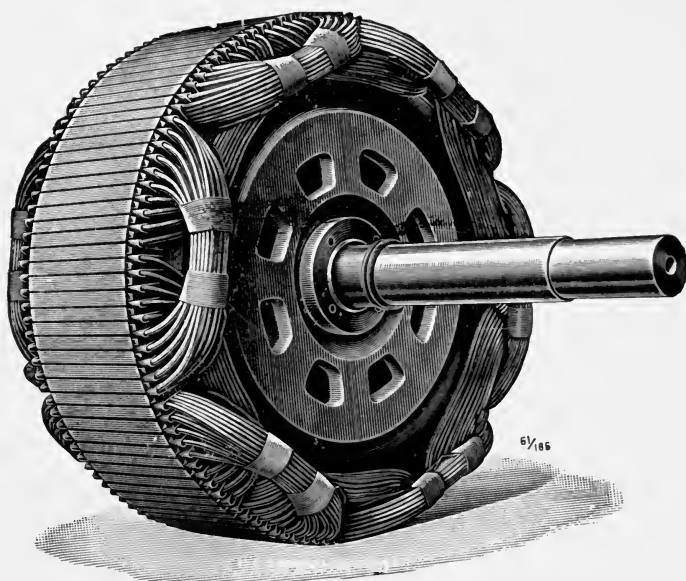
Wound Rotor of Three-phase Motor (*Körting Brothers*).
